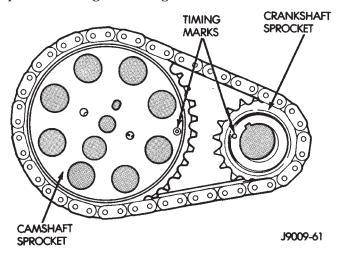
Crankshaft—Camshaft Alignment—Typical
